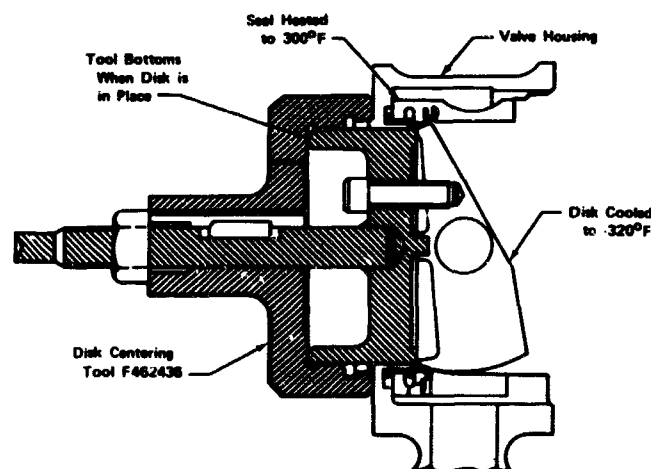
Assembly of Preburner Fuel Valve Shutoff Seal and Disk
